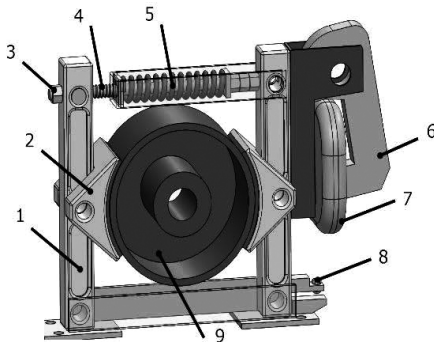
CAD model of drum brake type TKT-300: 1 – lever, 2 – centrally pivoted external shoe, 3 – rod with nuts for adjusting the braking torque, 4 – auxiliary spring, 5 – operating spring, 6 – armature, 7 – coil, 8 – screw for gap regulation, 9 – brake drum (not a brake element)
